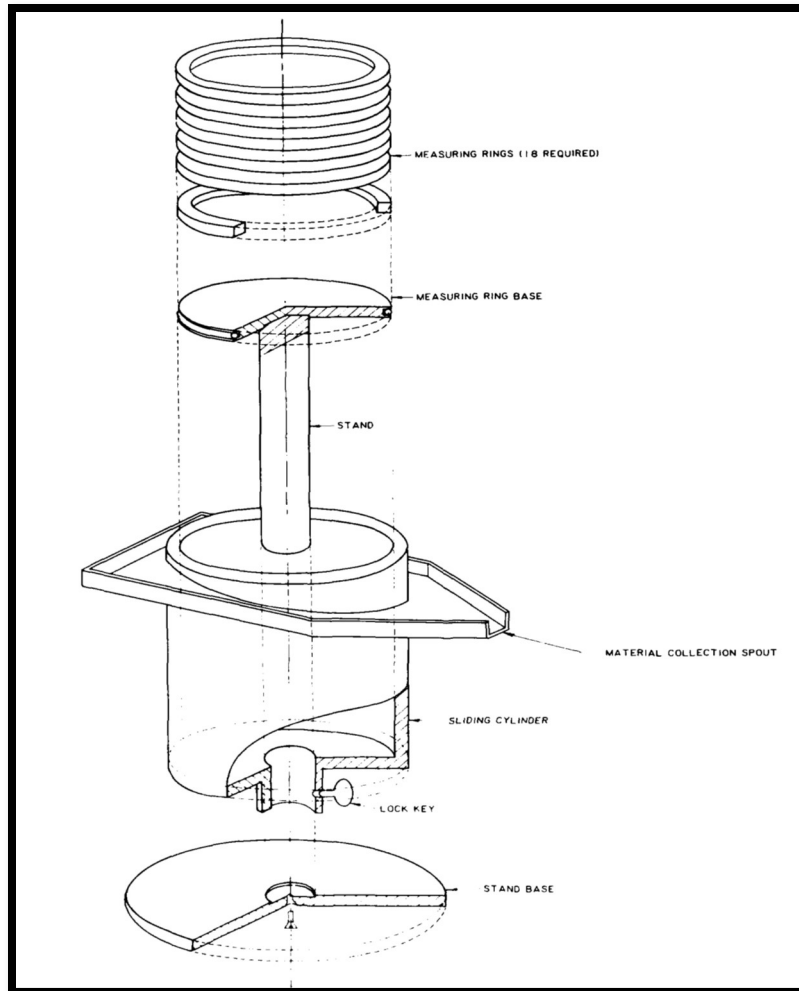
Exploded view of the self-weight apparatus (Cargill, 1983)
